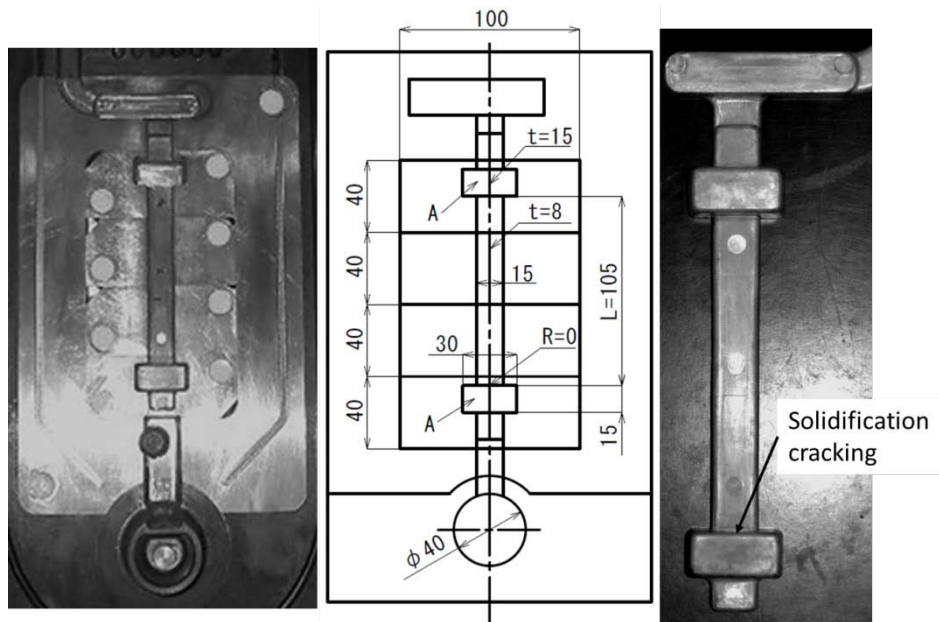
Appearance and dimension of solidification crack susceptibility test mold and a test sample by using semi-solid injection molding.
